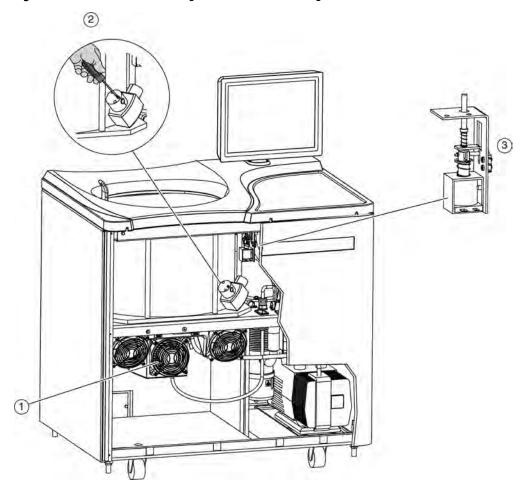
Internal Parts — Configuration "B" vents through the vacuum solenoid release screw
